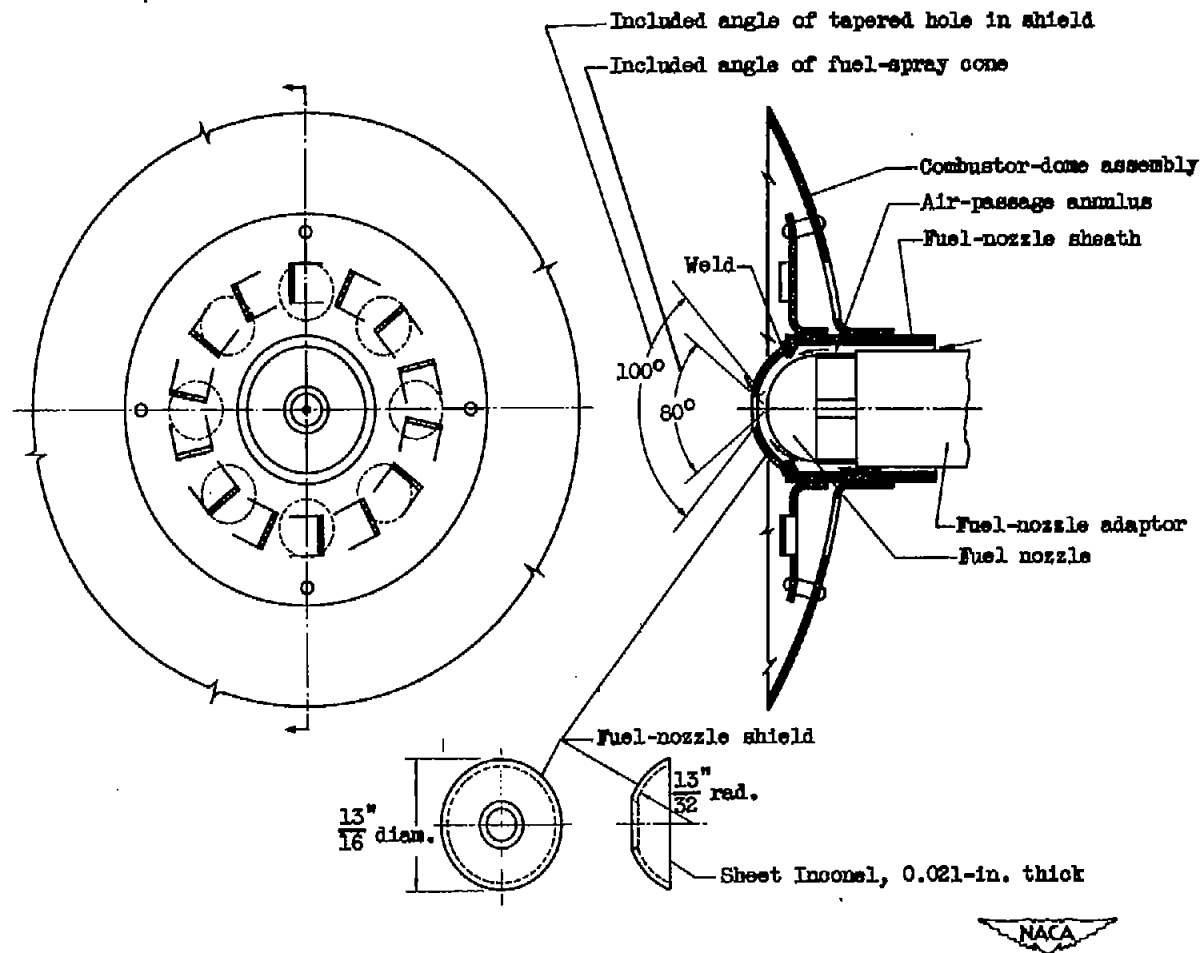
Details of construction and adaptation of fuel-nozzle shield to combustor-dome assembly.
